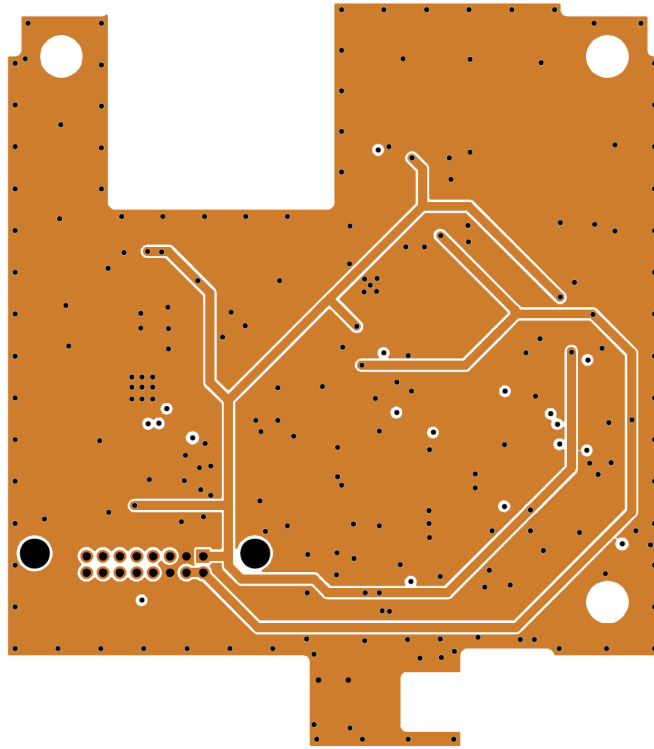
Top side of the engineering model PCB. This side houses all the components.
